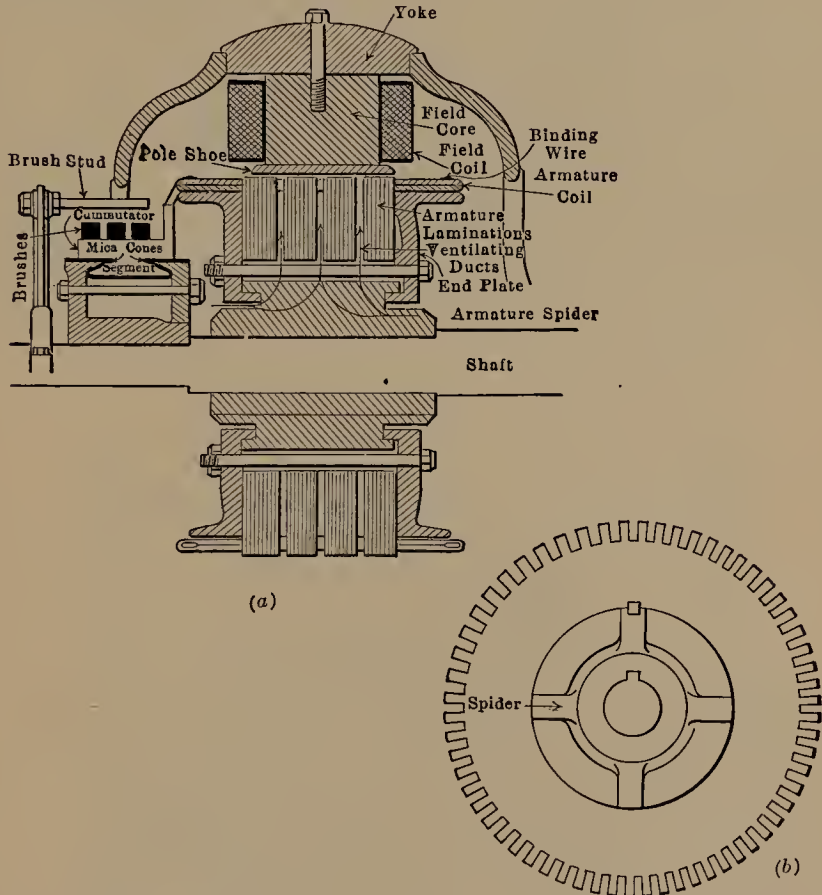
(a) Cross-section of a generator of moderate size; (b) armature stamping.
